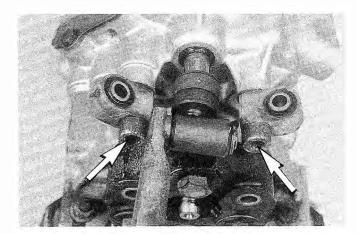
Shift console-to-transmission mounting bolts (arrows) to be removed. Transmission shown removed.
